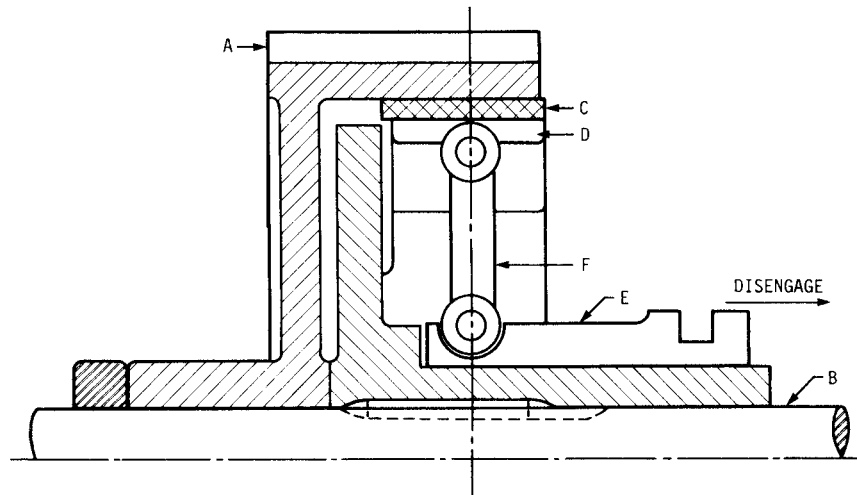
Schematic drawing of a radial clutch built within a gear; *A*, gear, the driving member; *B*, driven shaft; *C*, friction plate; *D*, pressure plate; *E*, movable sleeve; *F*, toggle link. This type of clutch can also be made within a V-belt sheave.
